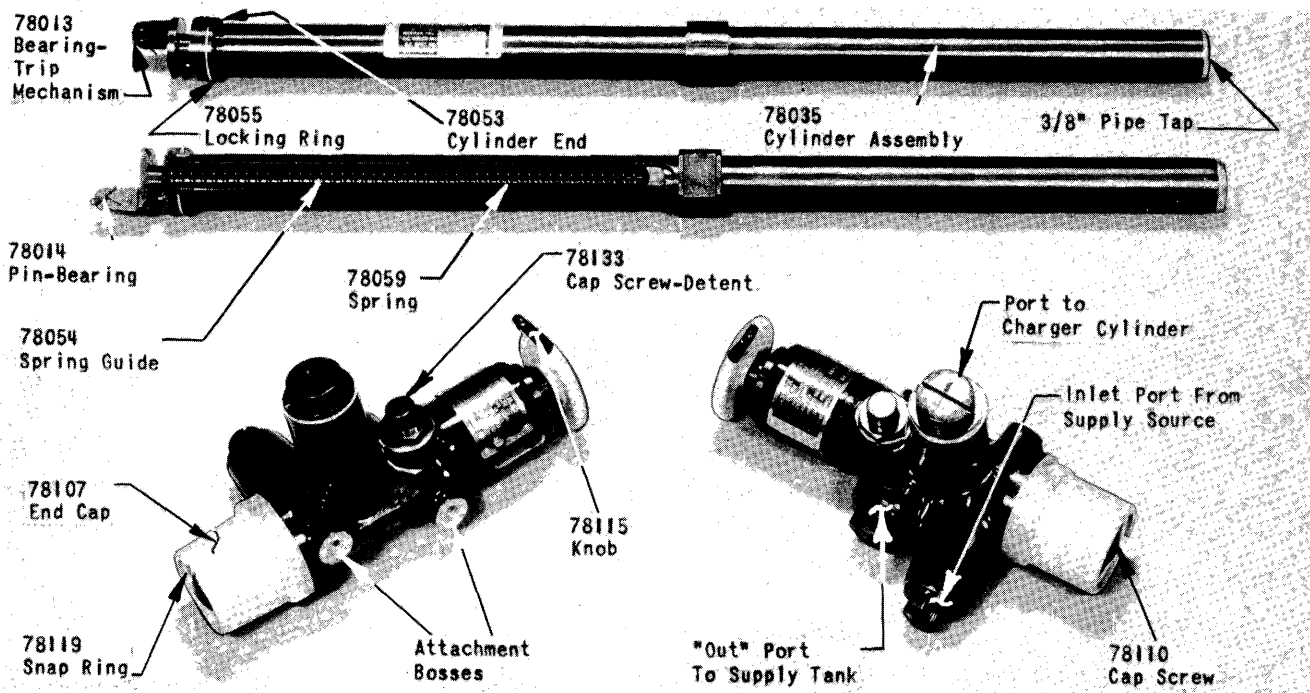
Hydraulic Charging Cylinder and Charging Valve
